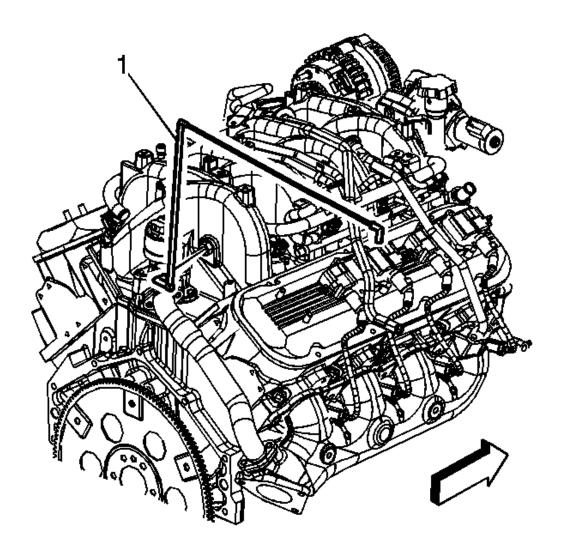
View Of Bypass Valve Vacuum Hose Courtesy of GENERAL MOTORS CORP.
